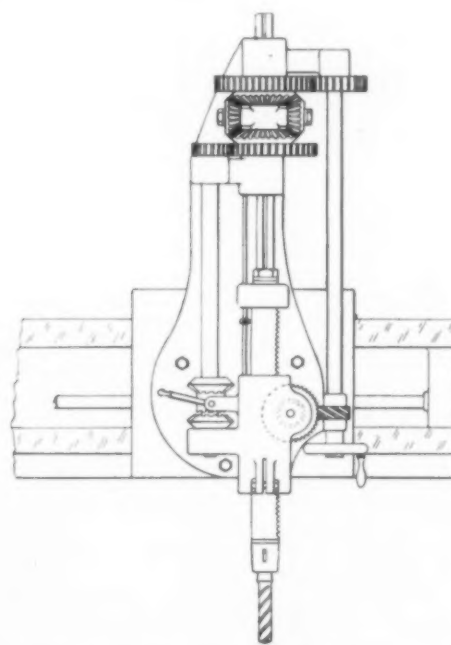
DRILL WITH AUTOMATIC FEED GOVERNED BY DRIVING TORQUE
